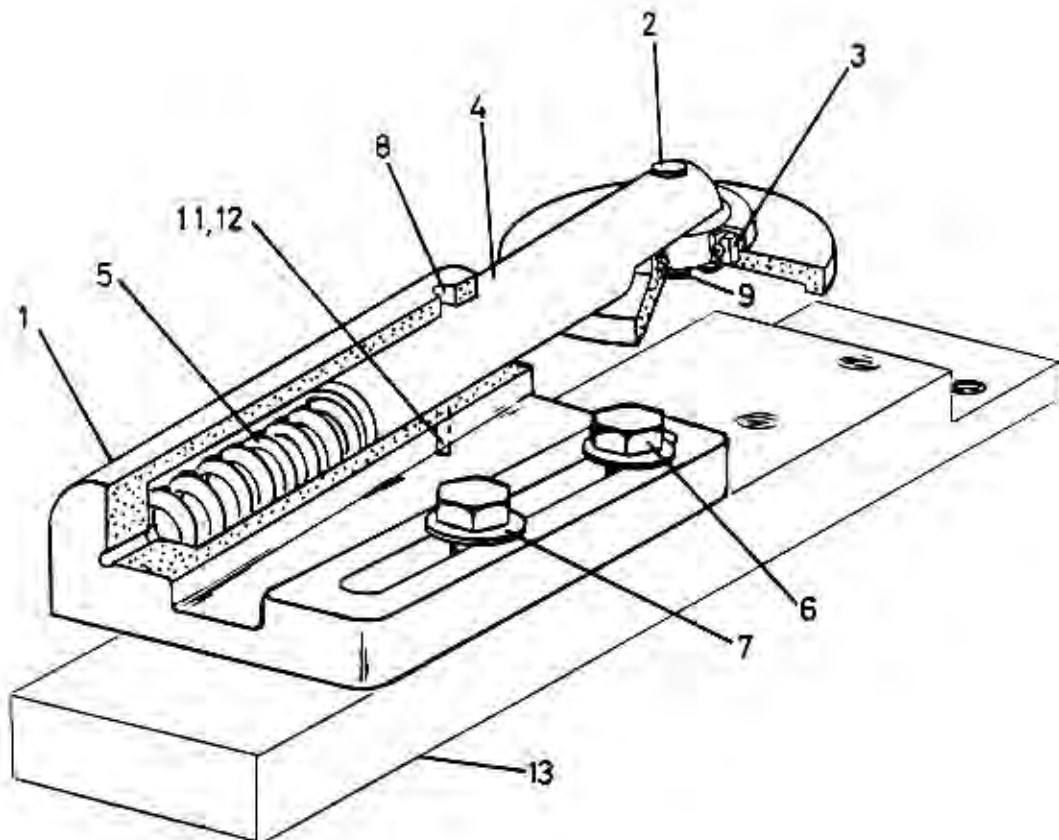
SINGLE SIDE ROLLER PRESSURE UNIT - INFEED
